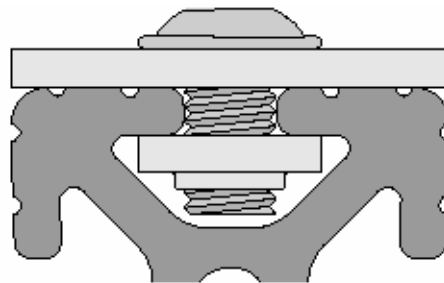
A side view of an 8020 piece showing how connections are made using machine screws and plates to hold everything together.
